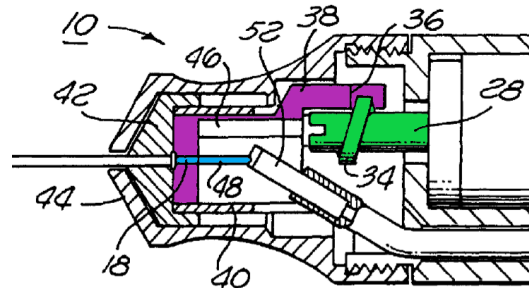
Schematic representation of a wobble plate mechanism that uses a follower with a fixed contact point on the wobble disk. Components: 28 = drive shaft, 34 = wobble disk, 36 = follower assembly, 48 = inner cutting tube. Adapted from: [72]
